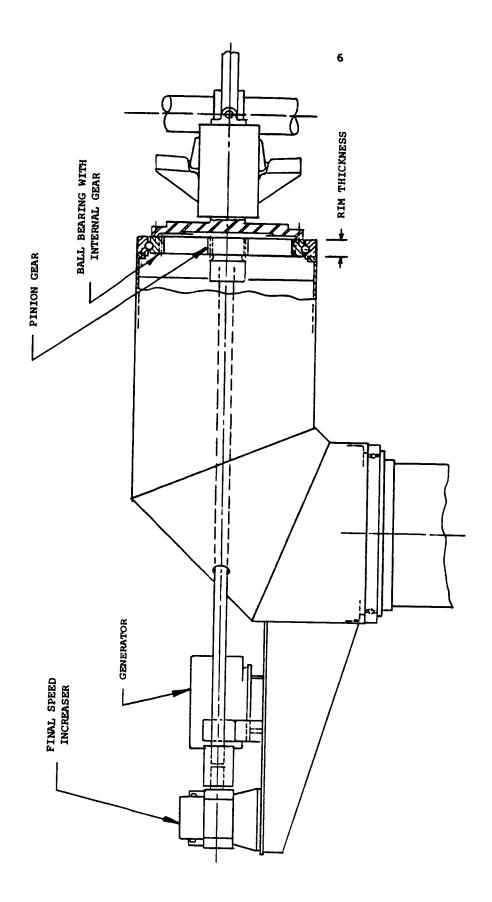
Assembly Drawing of Radar Gear - Reduction Unit
